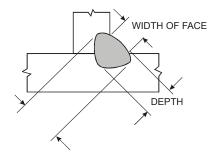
Weld Bead in which Depth and Width Exceed the Width of the Weld Face (see 3.6.2)
